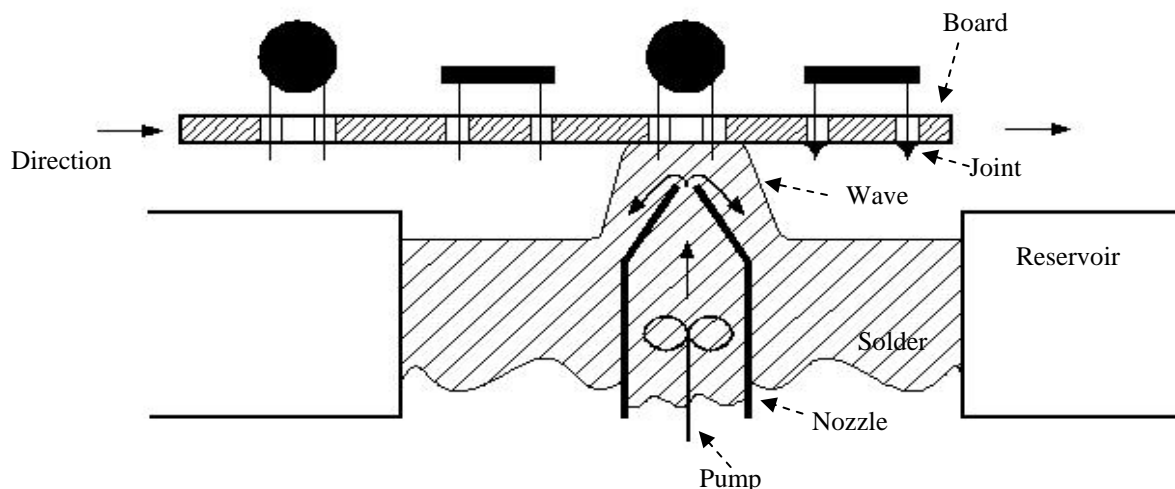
Principle of wave soldering technique [Wassink, 1984]. The board is moved across over the wave of solder pumped out through the nozzle. Joints are formed and excessive solder falls back into the rectangular reservoir for reuse.
